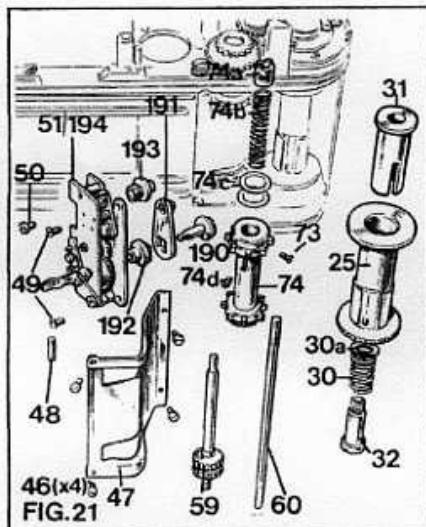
(v) The delayed action assembly (51/194) may now be removed, if required, by removing the three securing screws. (49 & 50).
